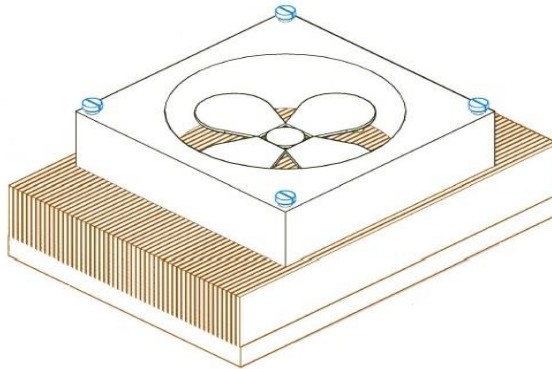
9 Fan-Heat sink assembly attached at the TEG cold plate
